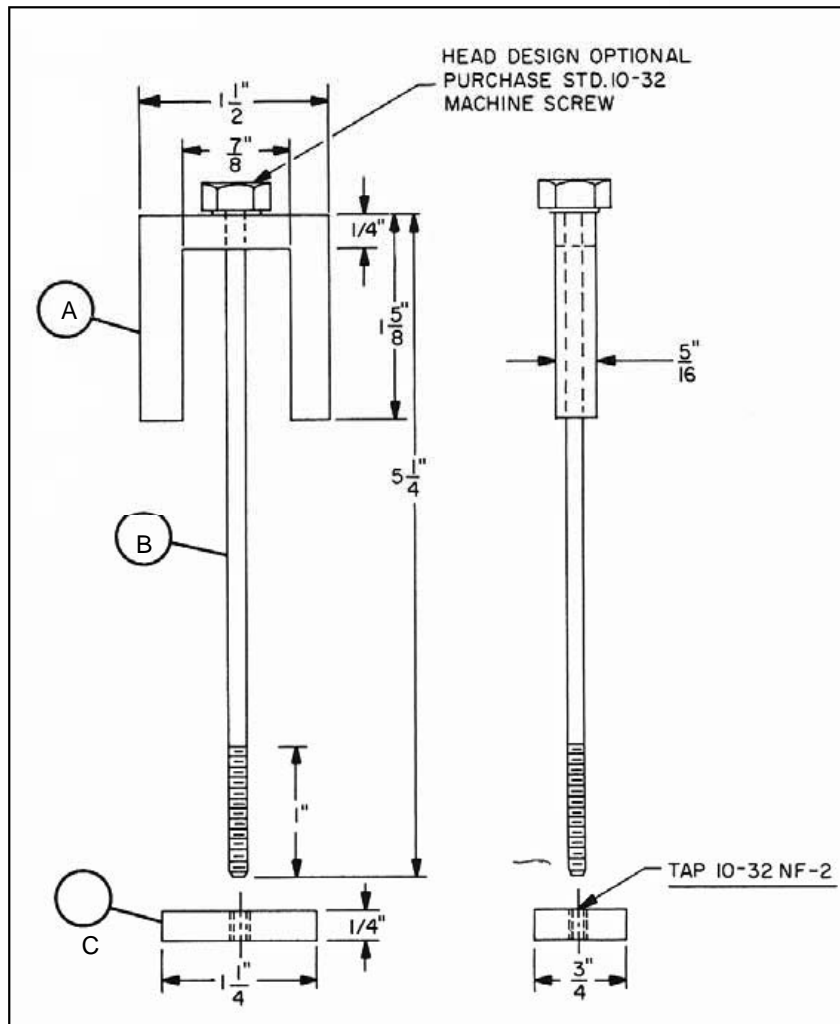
Drawing, 67-6002 Spring Assembly Tool
